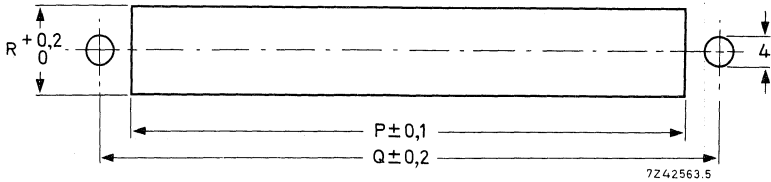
Piercing diagram for panel mounting; see Table 3 for dimensions P, Q and R. If bracket 4332 026 04630 and end piece 4332 026 04770 are used the circular holes are superfluous.
